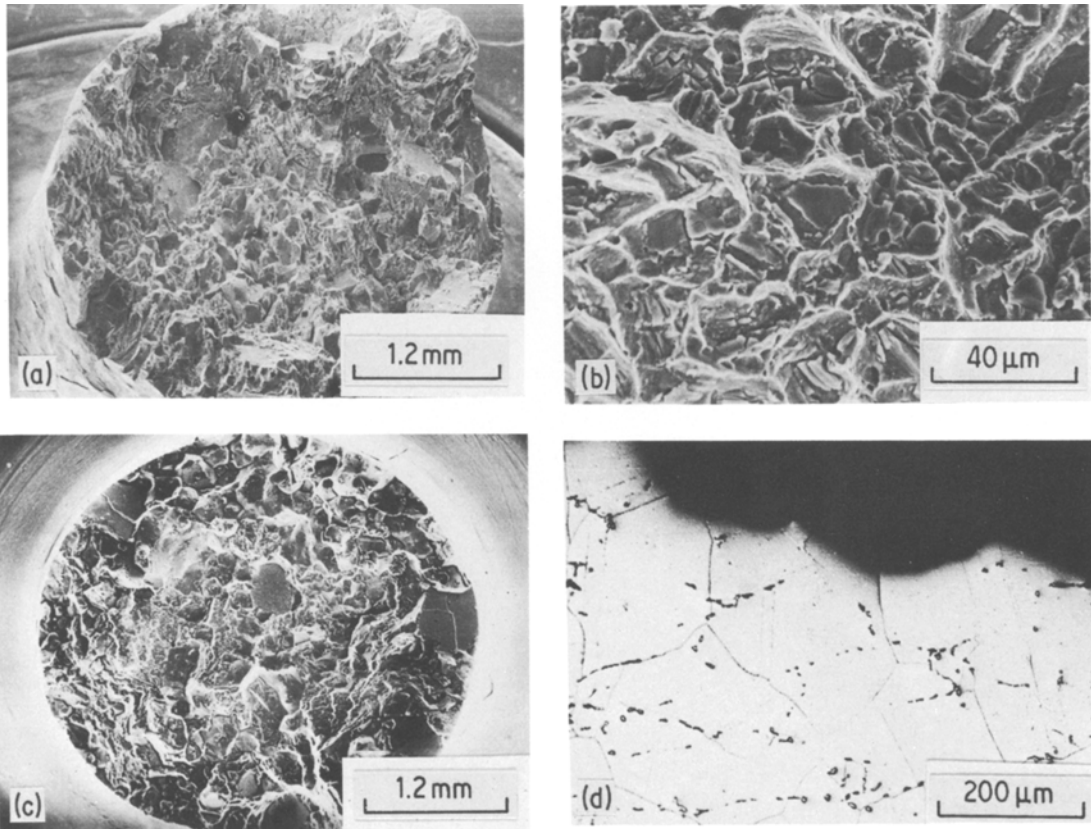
Tensile fracture morphology for EI-929 specimens tested in vacuum. (a) T-type specimen, 1075 K; (b) L-type specimen, 1075 K; (c) L-type specimen, 1075 K; (d) L-type specimen, 875 K.
